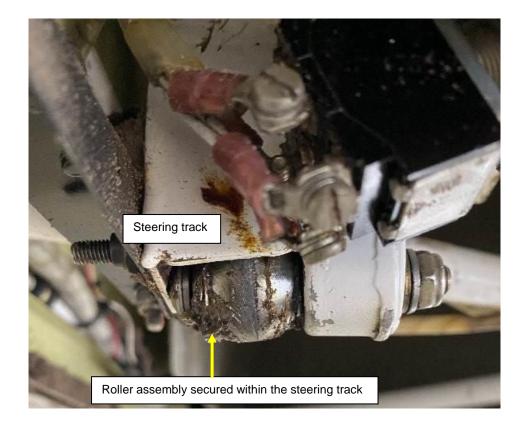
The roller assembly secured within the steering track (nose gear in the up position).
